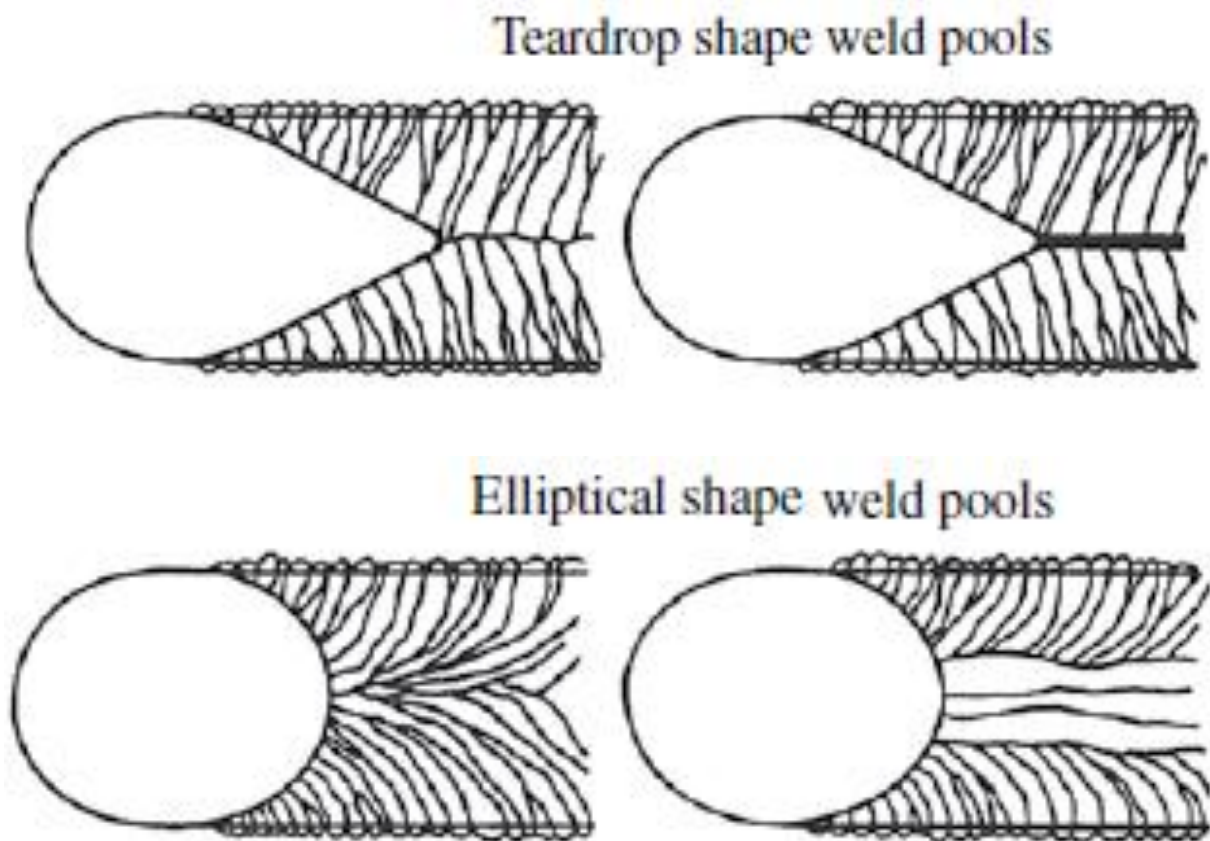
Magnified sketches for weld pool shapes.
